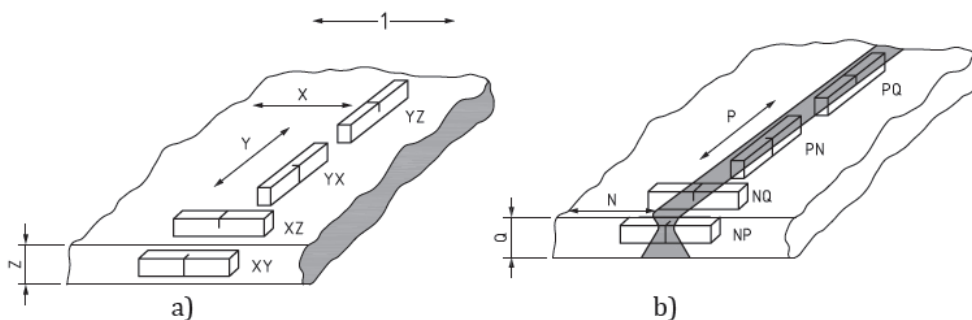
Orientation of crack plane for parent and weld metal [62].
